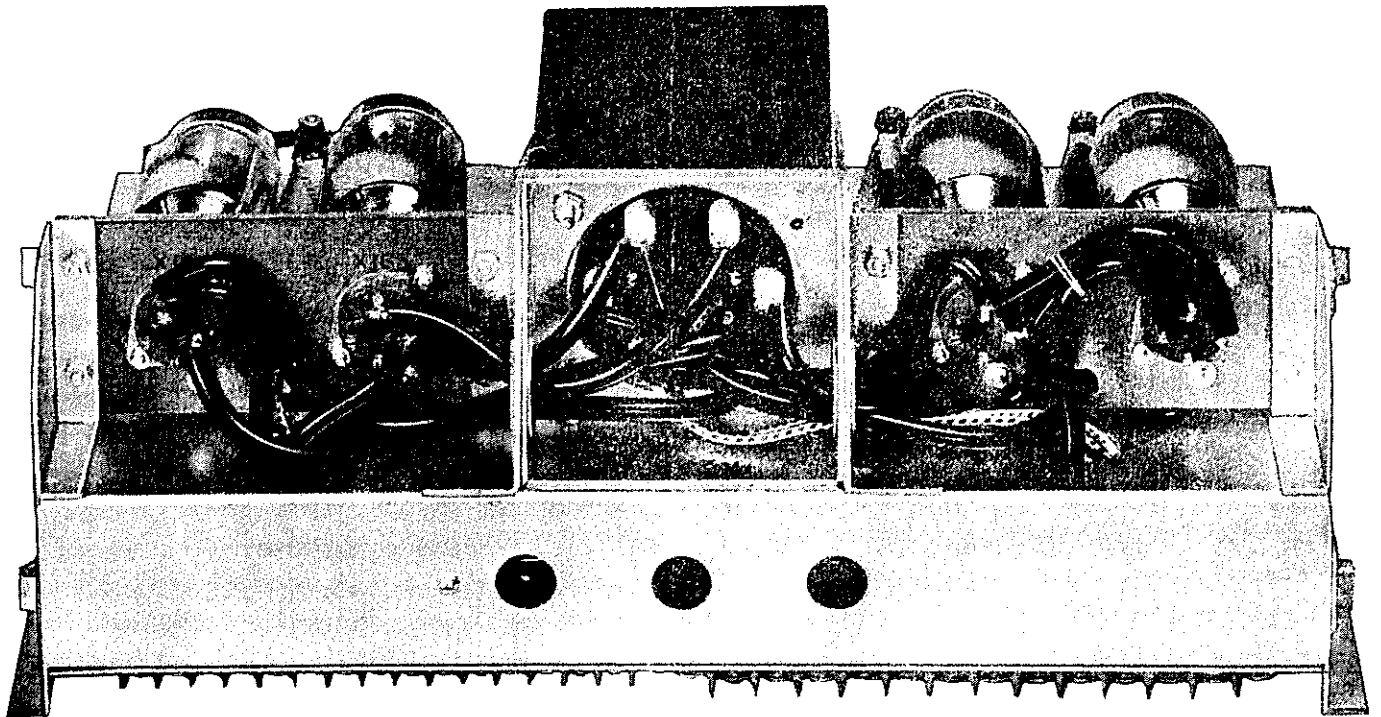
Power Supply Sub-Assembly, Bottom View, Showing Wiring
